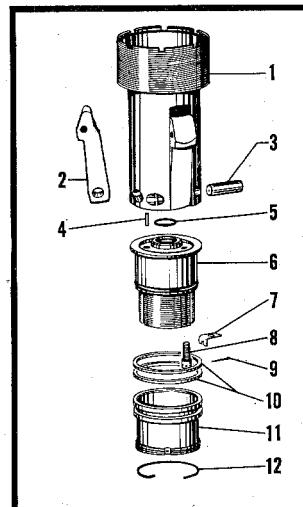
Assembly of Stop Levers and Reverse Dumping Mechanism onto Lever Sleeve
